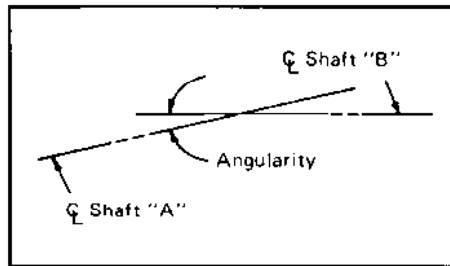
Angularity is the acute angle formed at the intersection of the axes of the driving and the driven machine shafts. When shafts are exactly parallel, angular misalignment is zero; but vertical or horizontal displacement of axes may be present (See Fig. 2).
